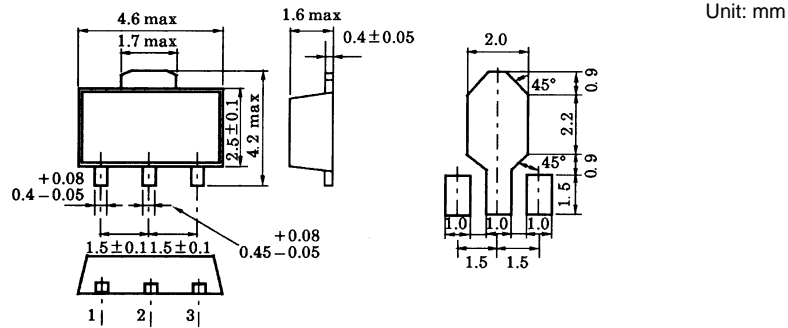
Minimum Pad Dimensions for a PW-MINI Package
